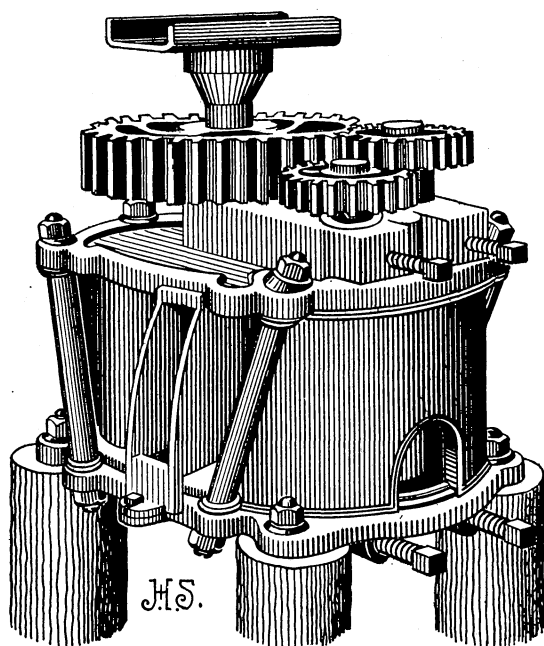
Heavy three-roller vertical horsepower cane mill.
